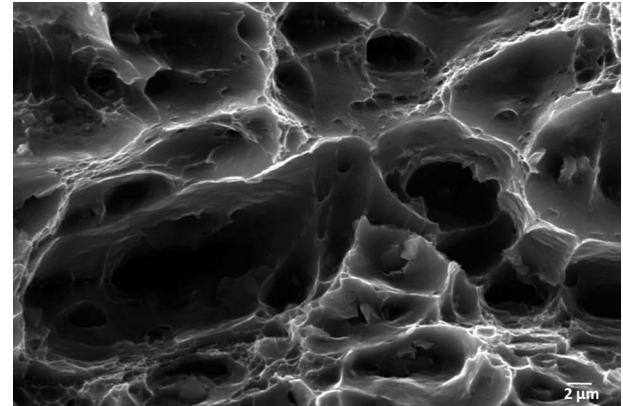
Higher magnified image of the fracture surface shown in Fig. 96
